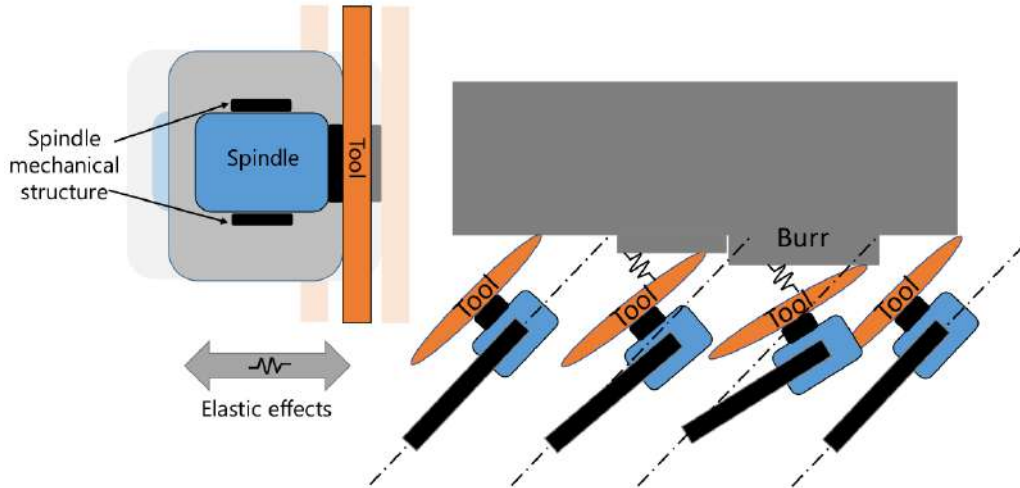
Deflection of the mechanical structure that handle the spindle due to high forces exchanged between deburring tool and workpiece.
